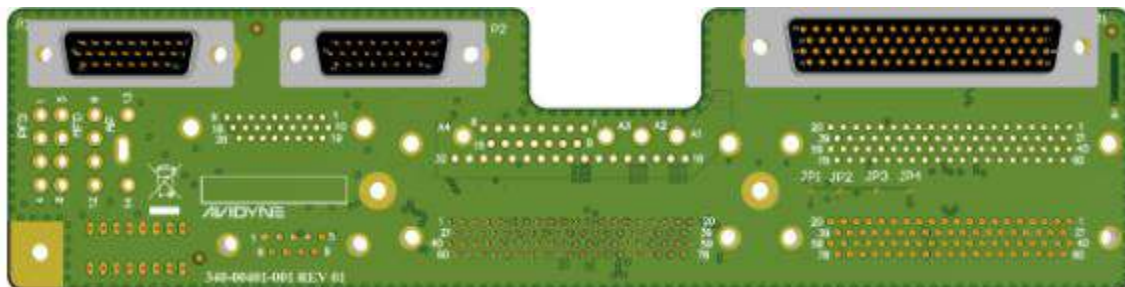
Vantage12 MFD EZ Adapter Bottom View
